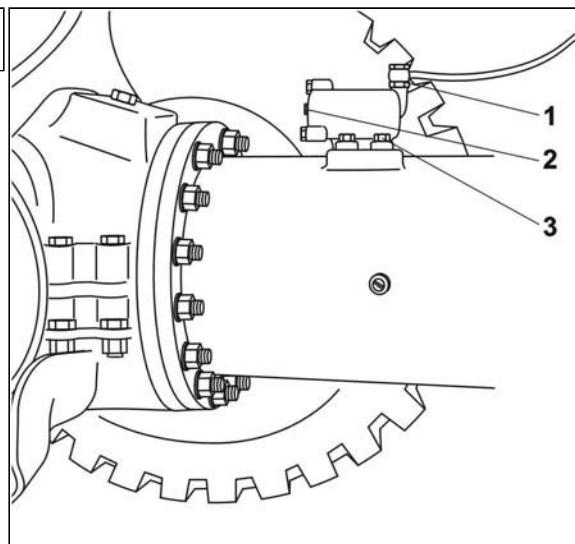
Shift cylinder of 2nd rear axle differential lock - removal
